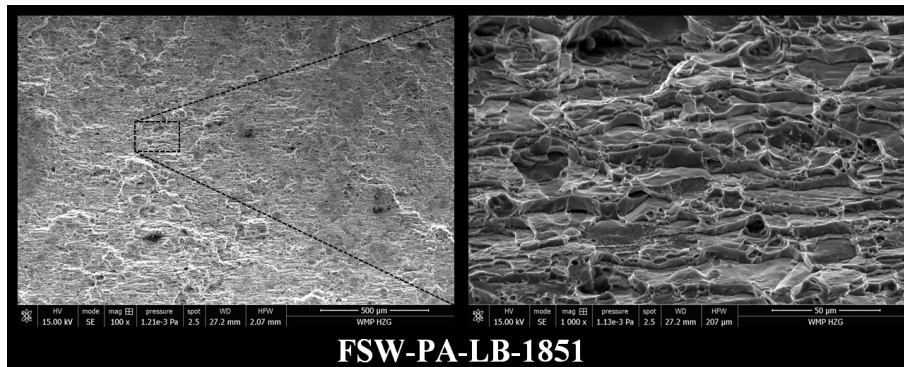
SEM micrographs of fractured surface of the FSW-PA-LB-1851 weld.
